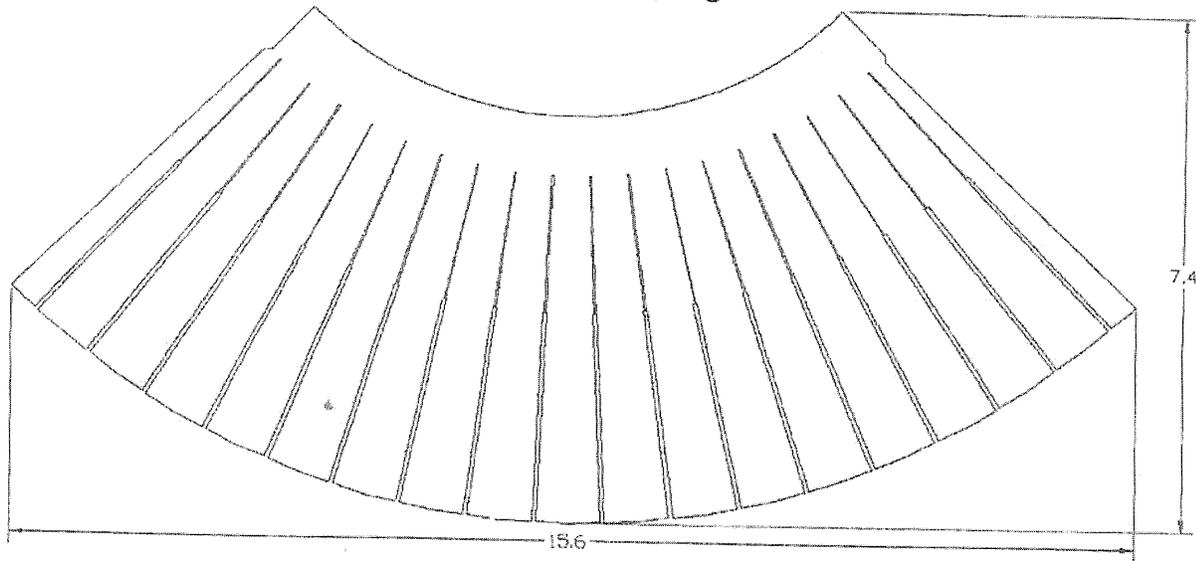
Overall Dimensions, in inches, of horizontal element circuit board.
